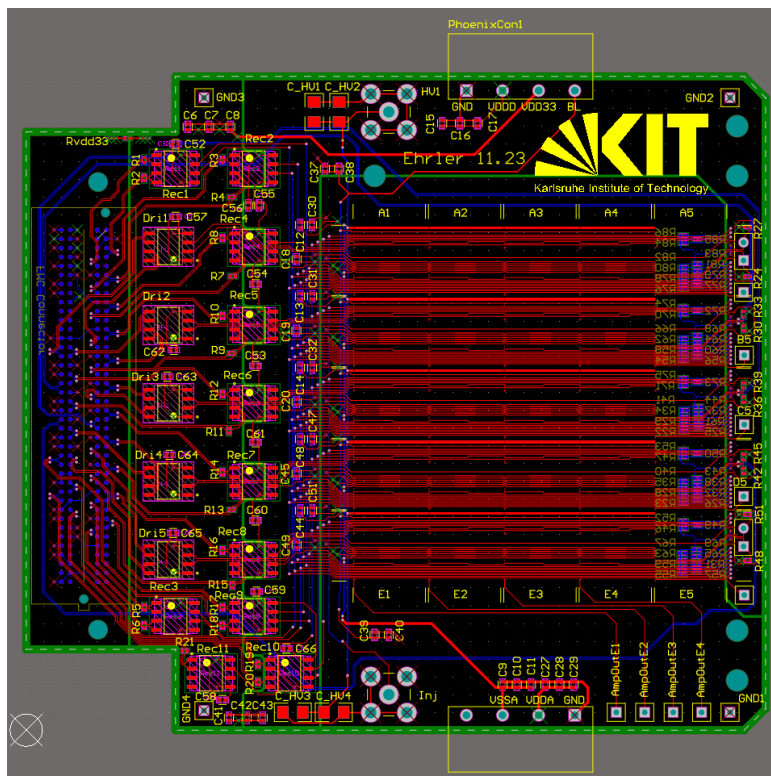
Layout of the 5×5 HitPix2 bump-bonding PCB. The PCB was designed by F. Ehrler.
